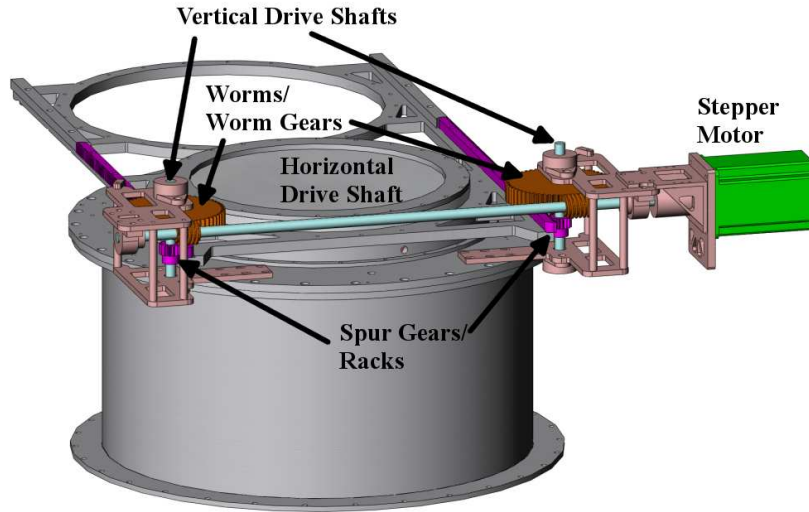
DWM drive mechanism model with stepper motor (green), drive shafts (blue), worm/worm gears (orange), and spur gear/racks (magenta).
